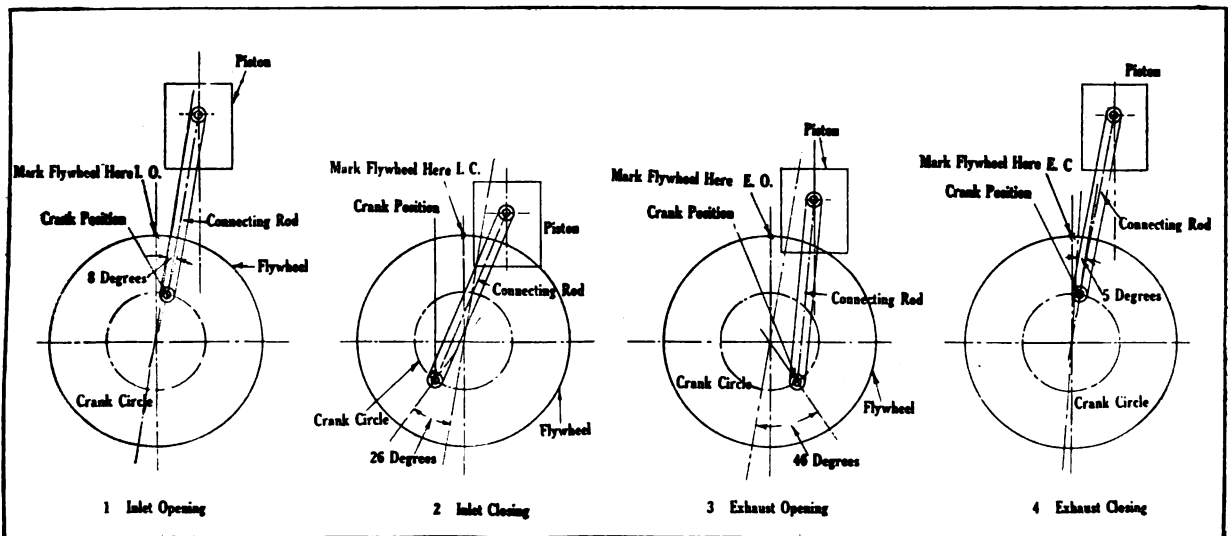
Illustrating Valve Timing Diagram for Marking Opening and Closing Points on Periphery of Flywheel.
